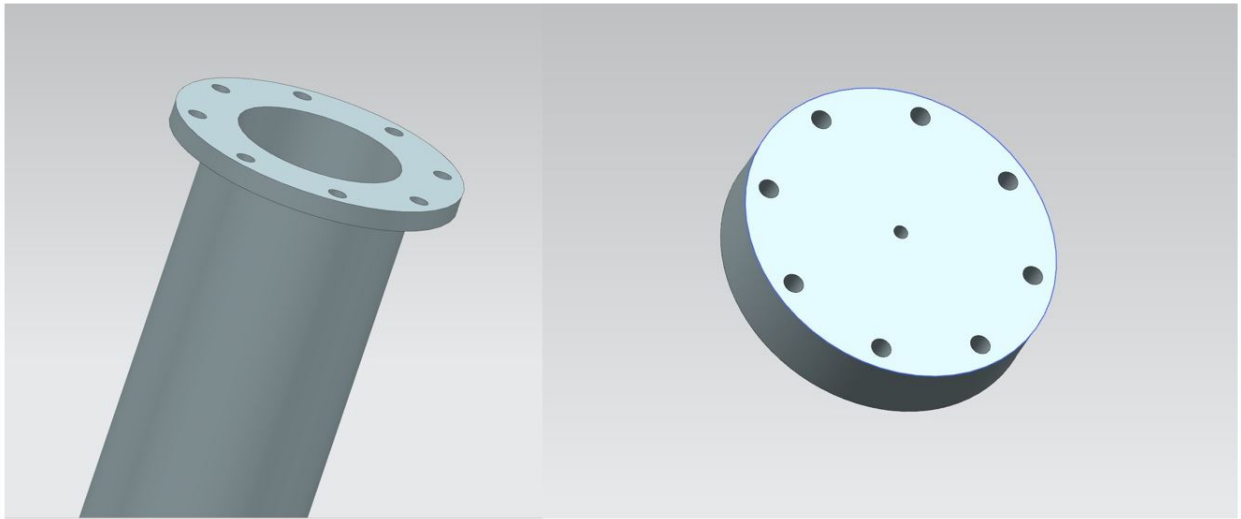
Closeup view of the inner chamber and its weldable end cap.
